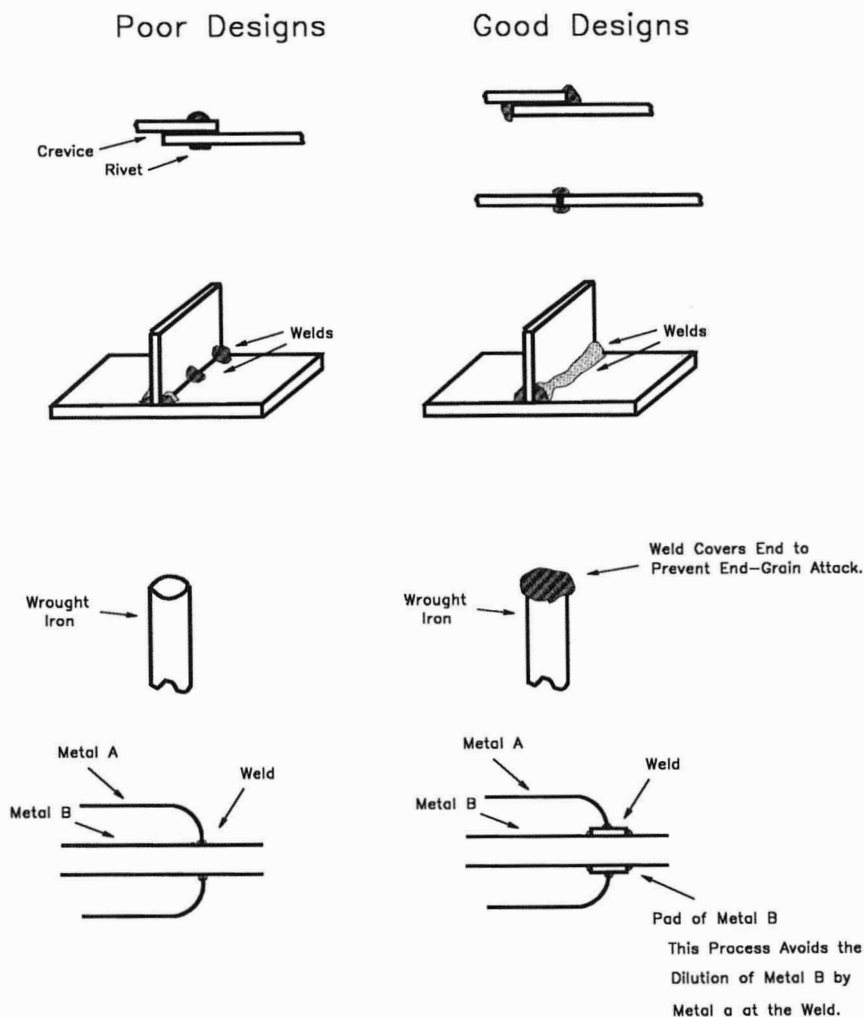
Welding techniques to avoid corrosion problems.
